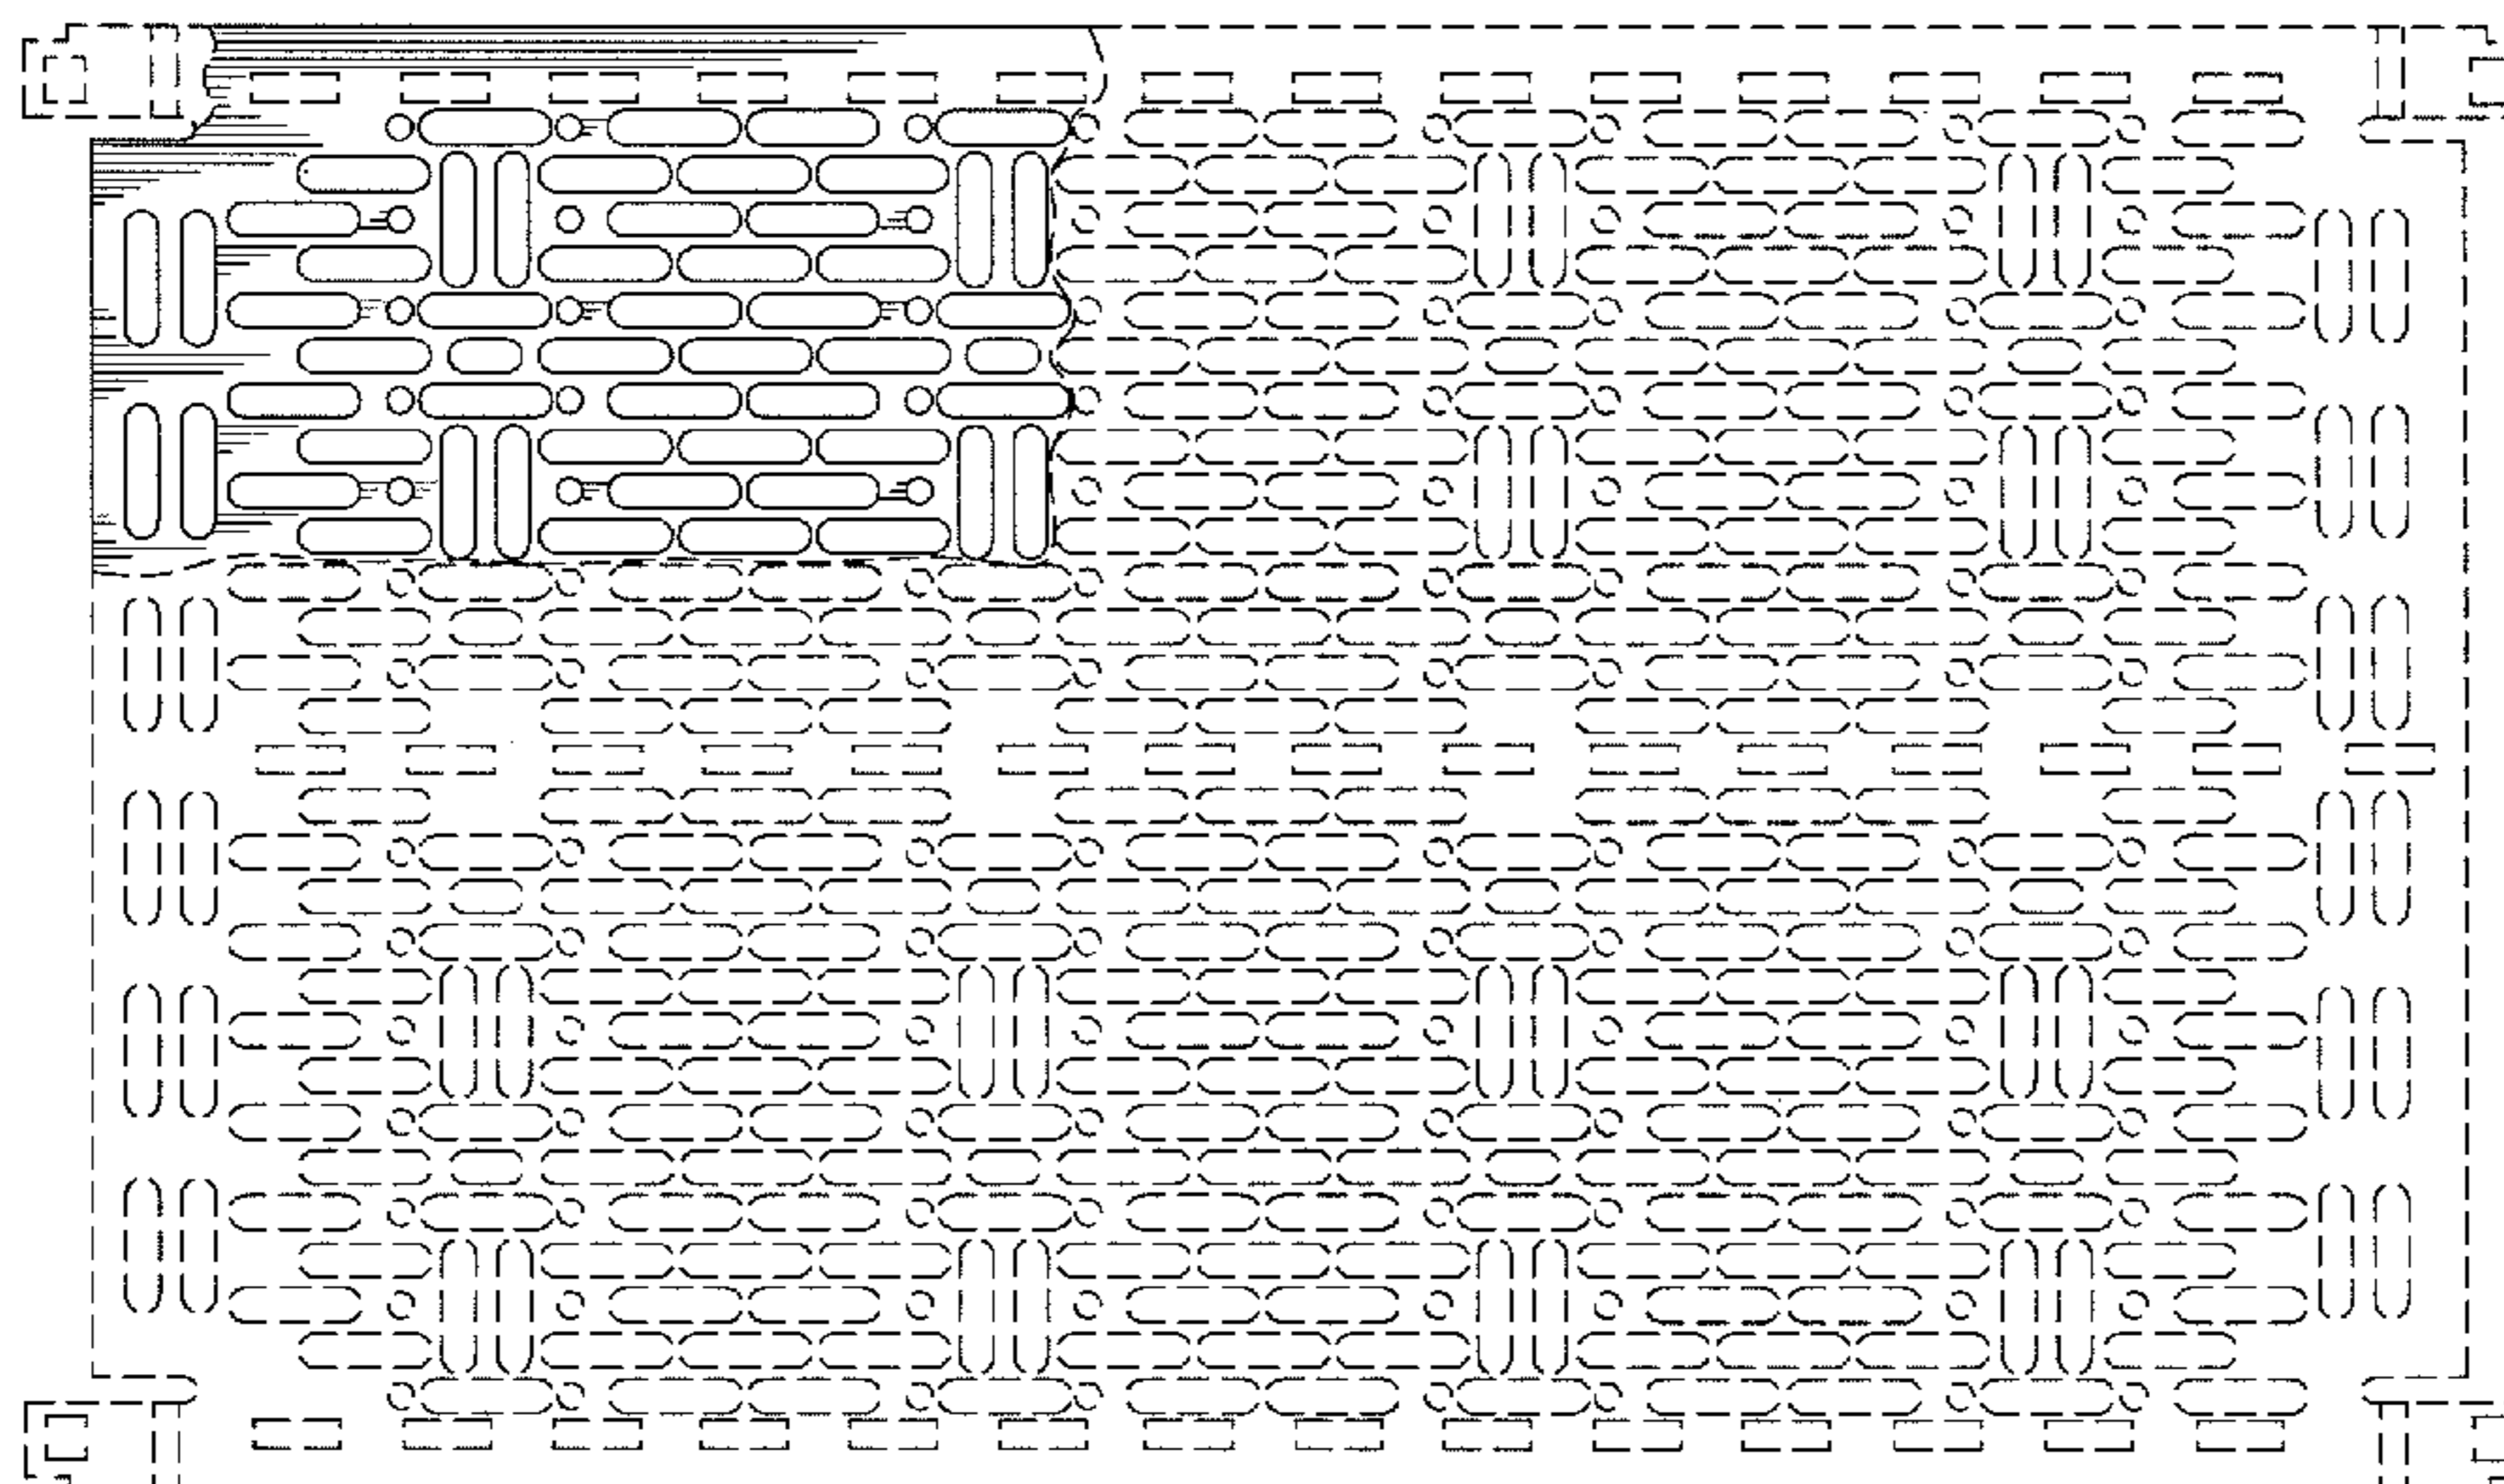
is a front view of the electronics rack with a universal hole pattern of FIG. 1.
